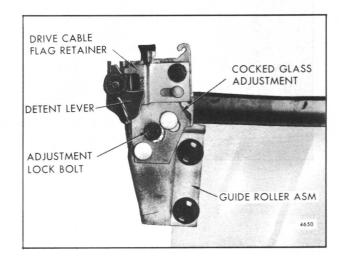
Window Guide Roller Assembly - Upper Right
